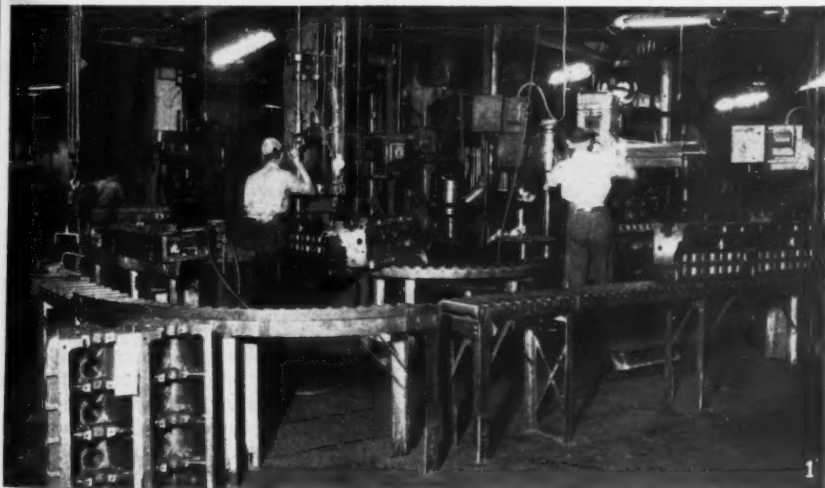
Roller conveyors are used to handle large parts such as cylinder blocks.
